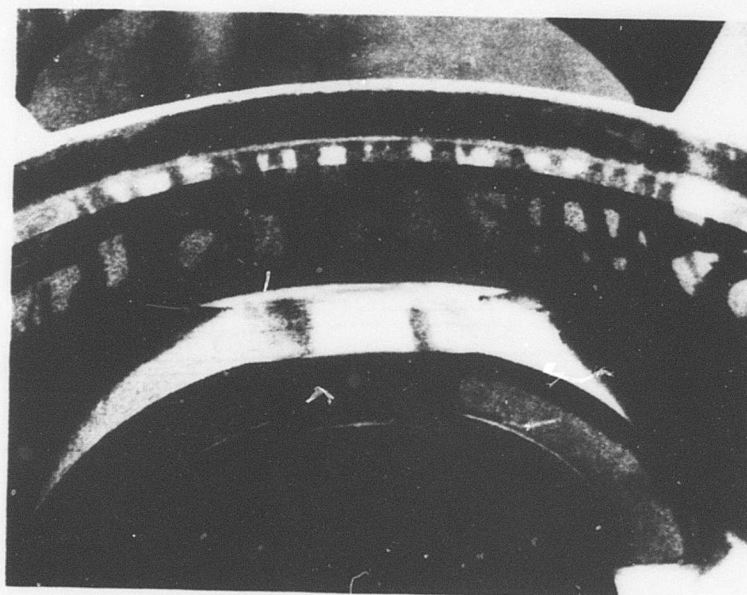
Cracks in the Input Gear Roller Bearing Bore of S/N 2 Housing.
